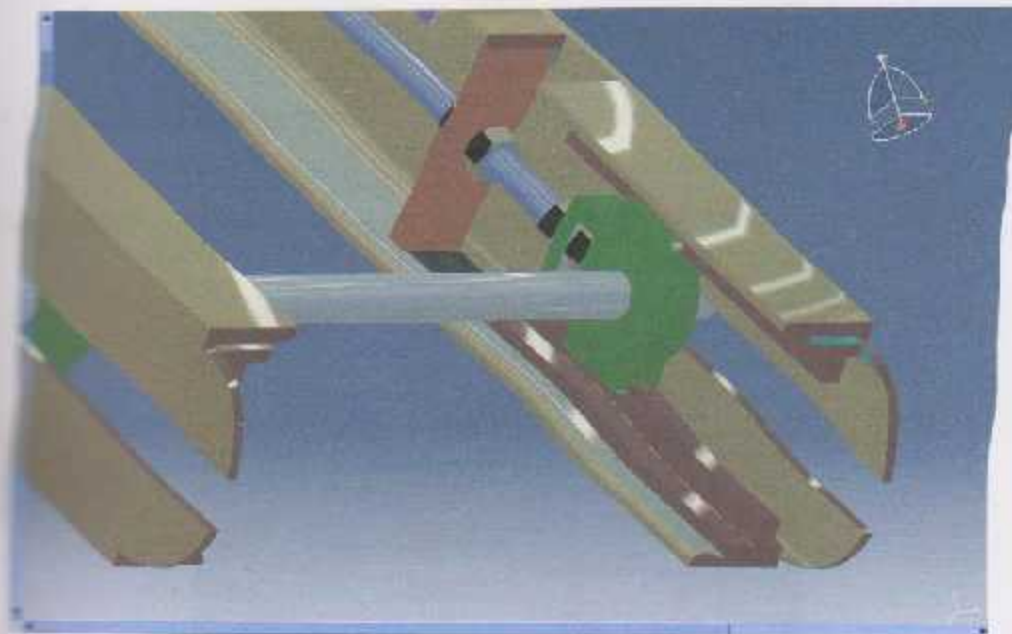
the driven shaft with U-beam, and UCT ball bearing
